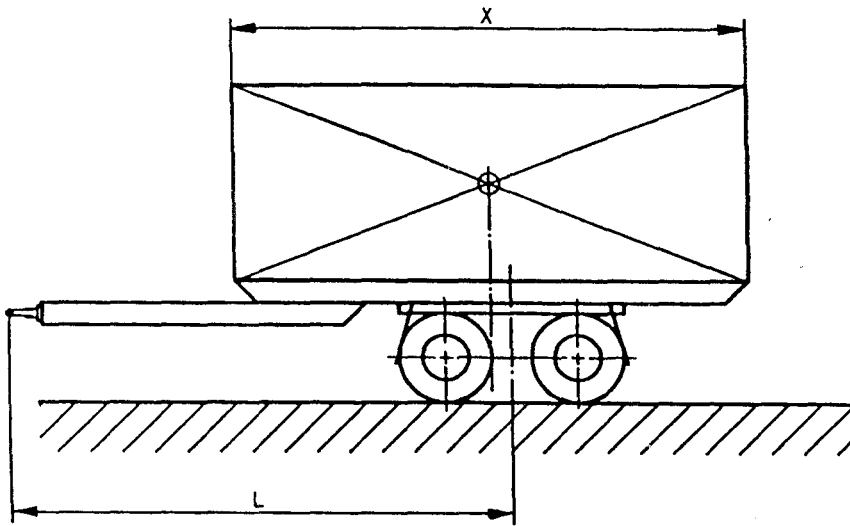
DIMENSIONS OF CENTRE-AXLE TRAILER
